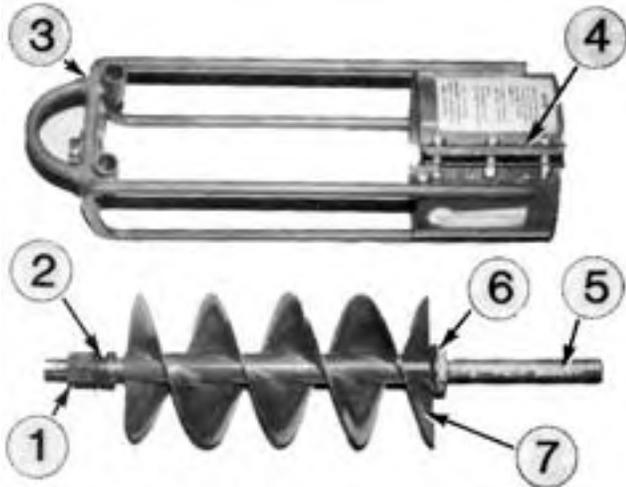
Wheatheart Safety Auger Assembly: (1) Locknuts, (2) Spring, (3) Frame, (4) Auger Tube Clamp, (5) Shaft, (6) Disc Clutch, (7) Inlet Fighting.
